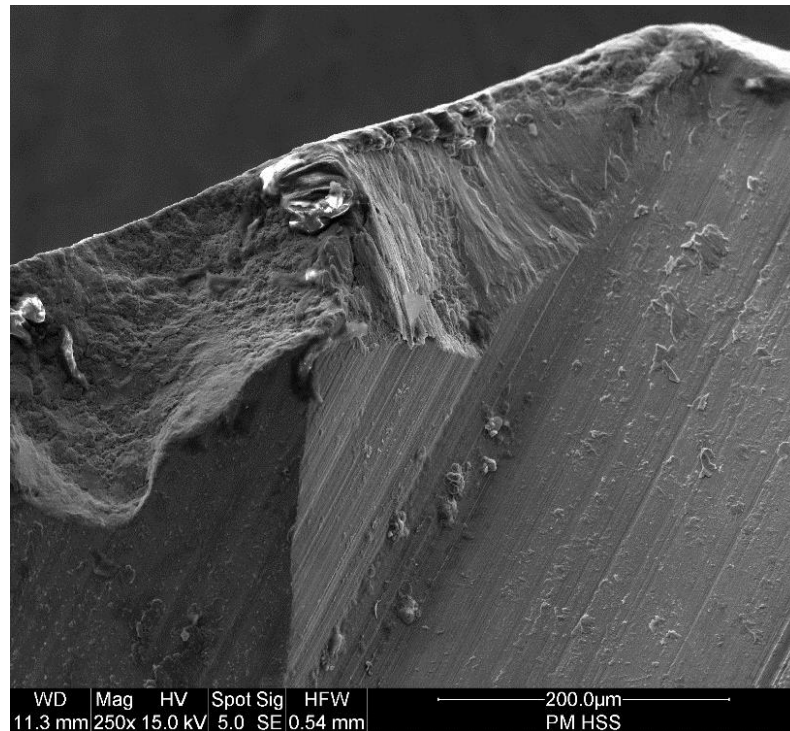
250x SEM flute view of cutting edge HSS drill bit after drilling 60 holes in PM titanium.
